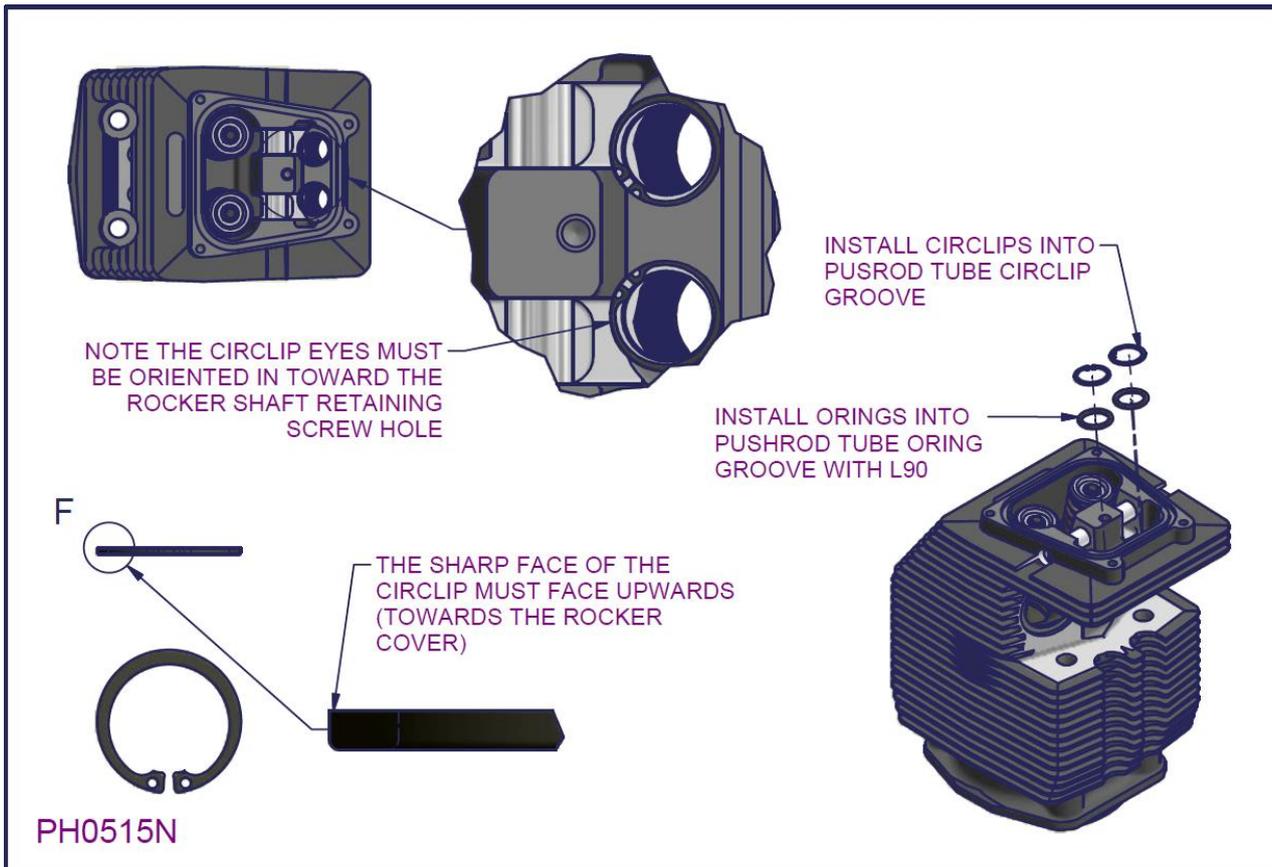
2200/3300 cylinder assembly 5b (Internal O-ring groove cylinder head)
